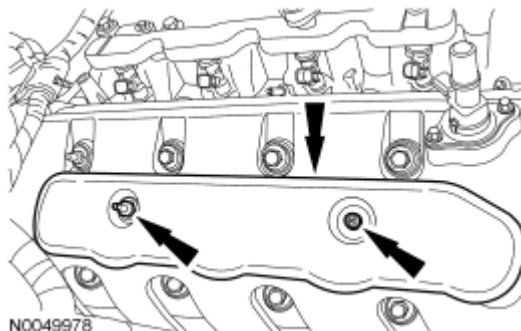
Locating RH Coil-On-Plug Cover Bolt & Stud Bolt
